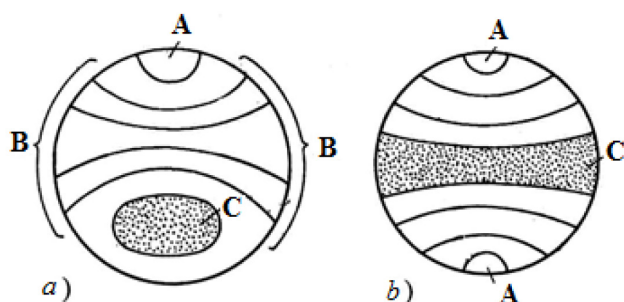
The fracture type: a - for bending with torsion; b - for plane bending
